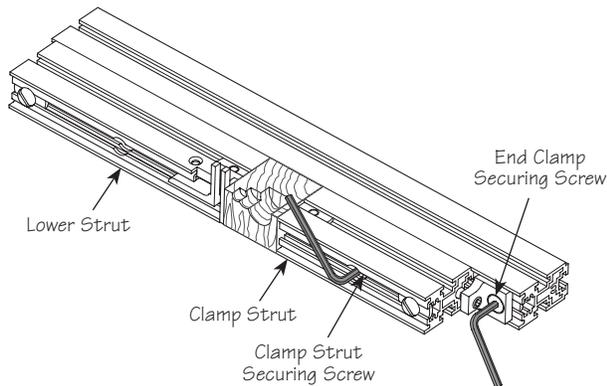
Loosen clamp strut screw and end clamp securing screw.
